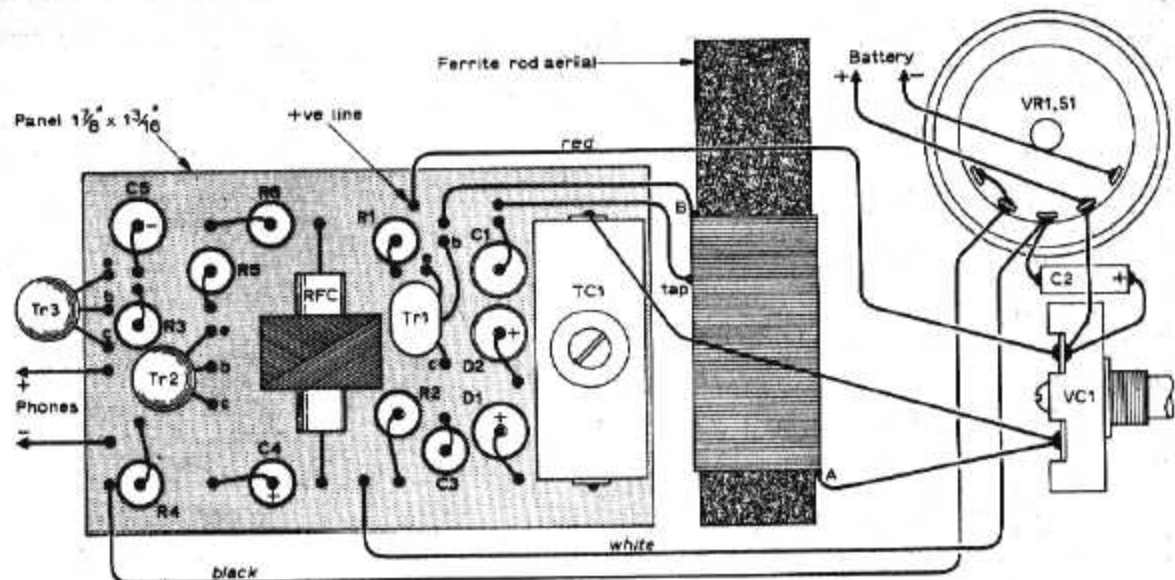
Top view of paxolin board and connections to separately mounted components.
